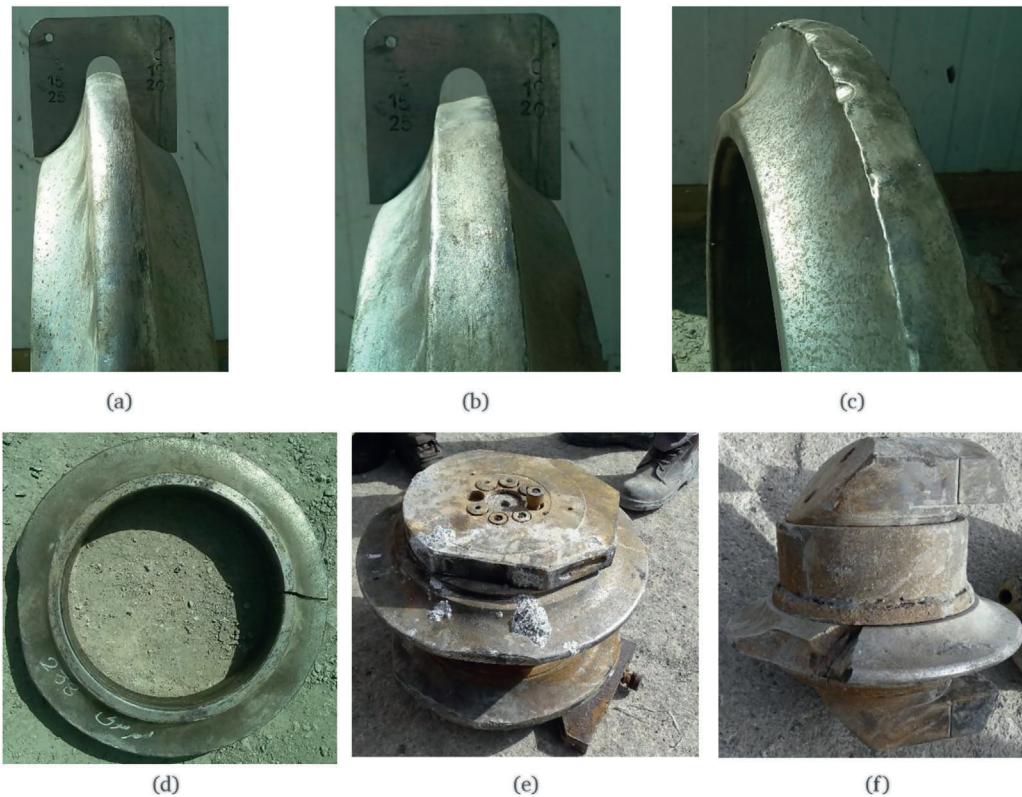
Various disc cutter wear and failure patterns: (a) normal wear, (b) uneven wear, (c) edge curling or mushrooming, (d) cutter ring fracture, (e) disc cutter offset grinding, and (f) bearing damage and ring displacement.
